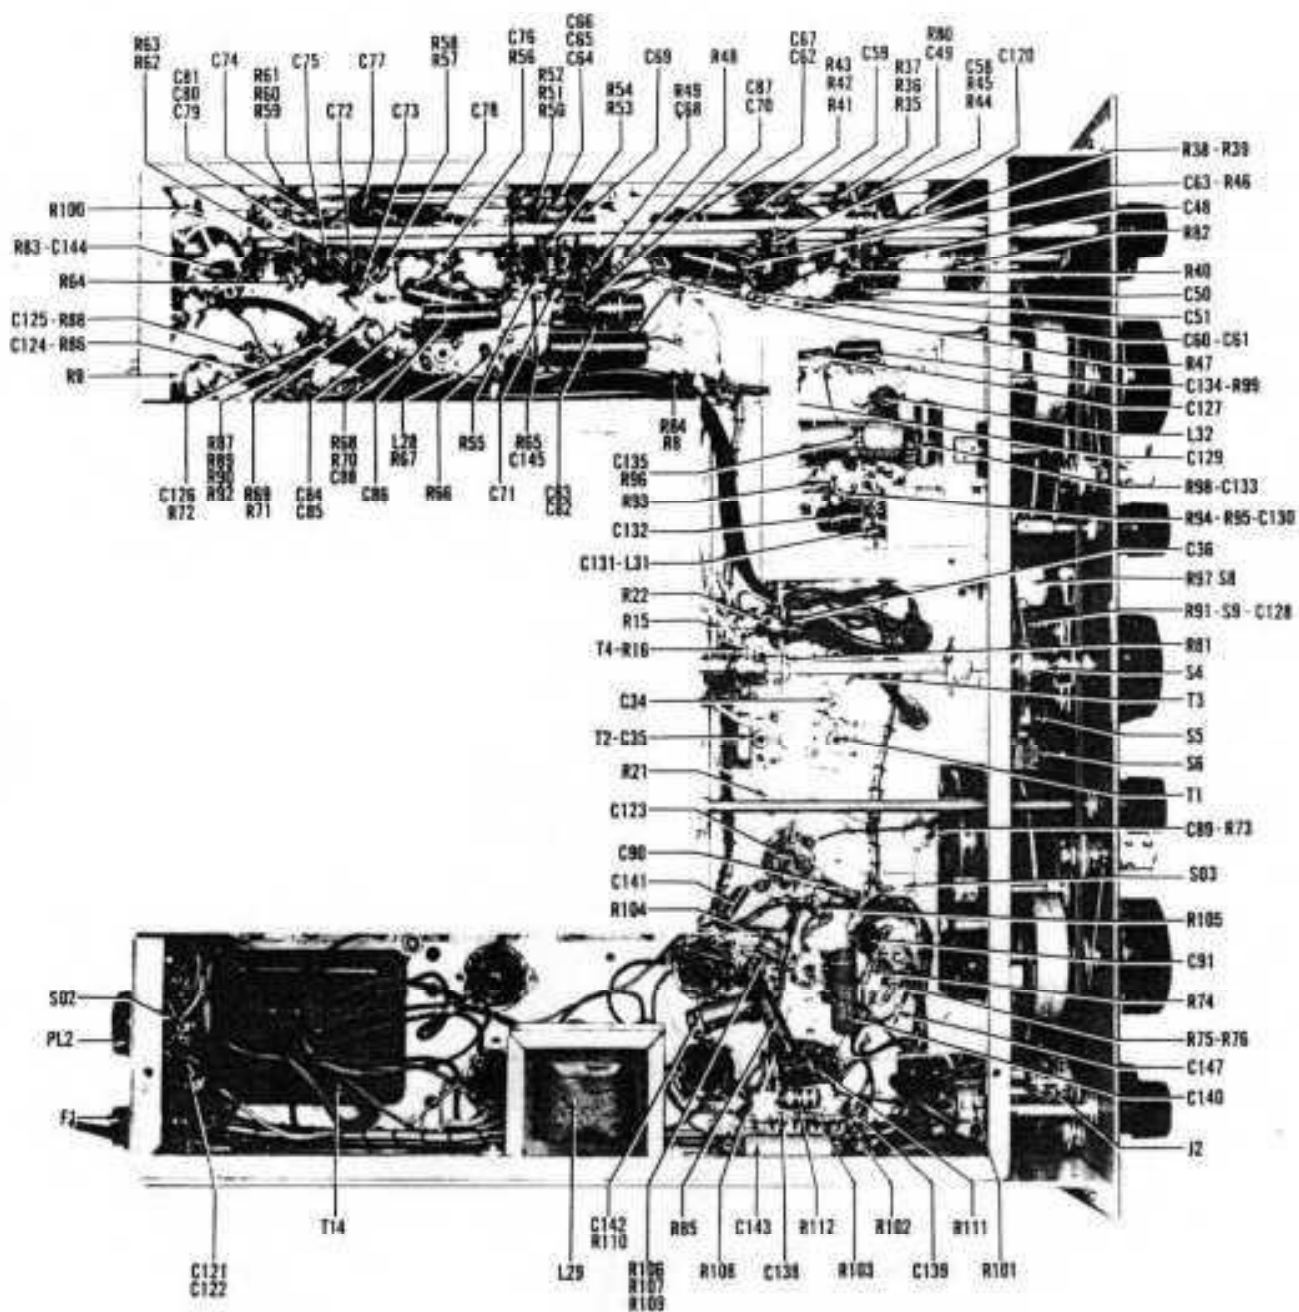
Bottom View of 2nd Converter Sub-Chassis Showing Component Location
